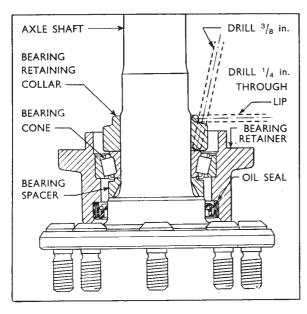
Drilling Procedure for Axle Shaft Bearing Collar
